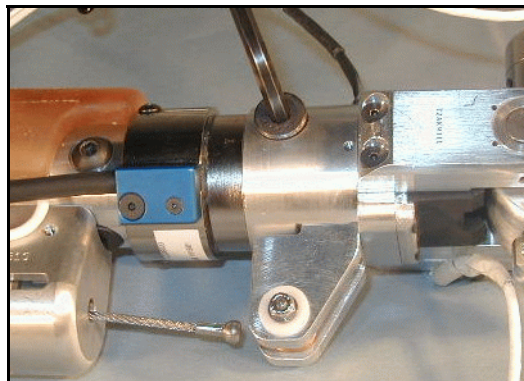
Attaching Ankle Assembly to Lower Leg
